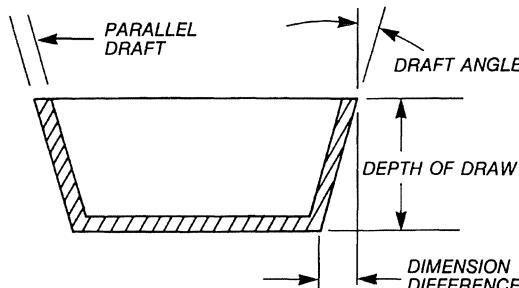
Example of mold-cavity draft angle required to ensure removal of molded product during its mold ejection action.
